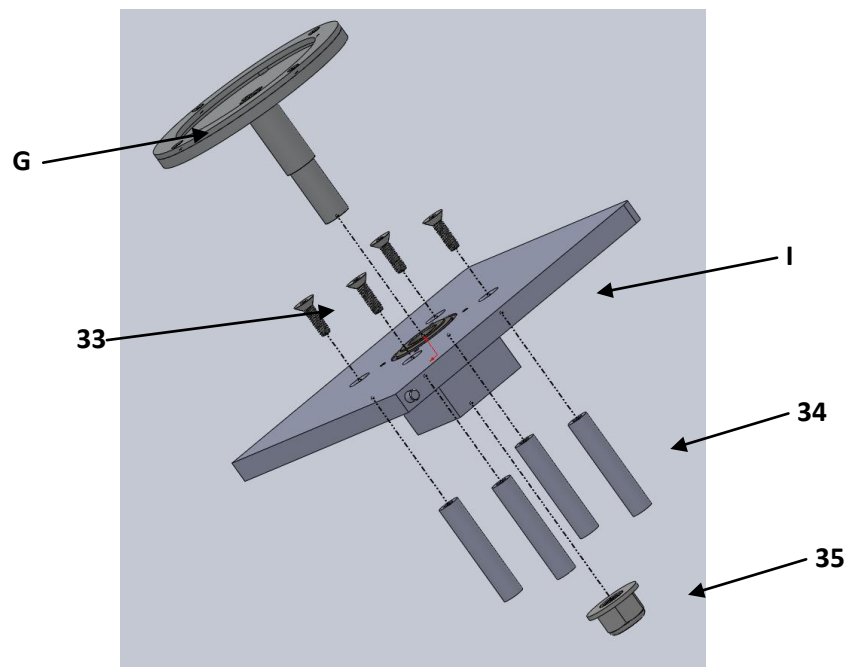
Fixture and Table Assembly (J) – (G, I, 33, 34, 35)
